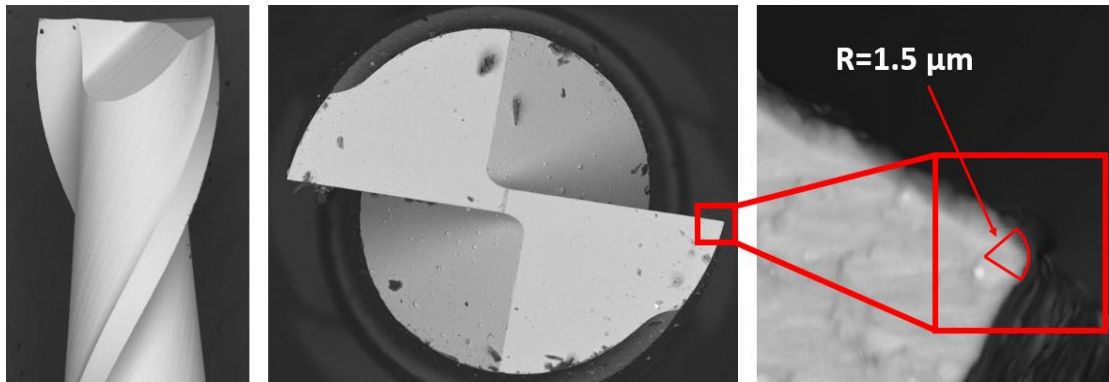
AlTiN coated Tungsten carbide micro end mill used with cutting edge radius
